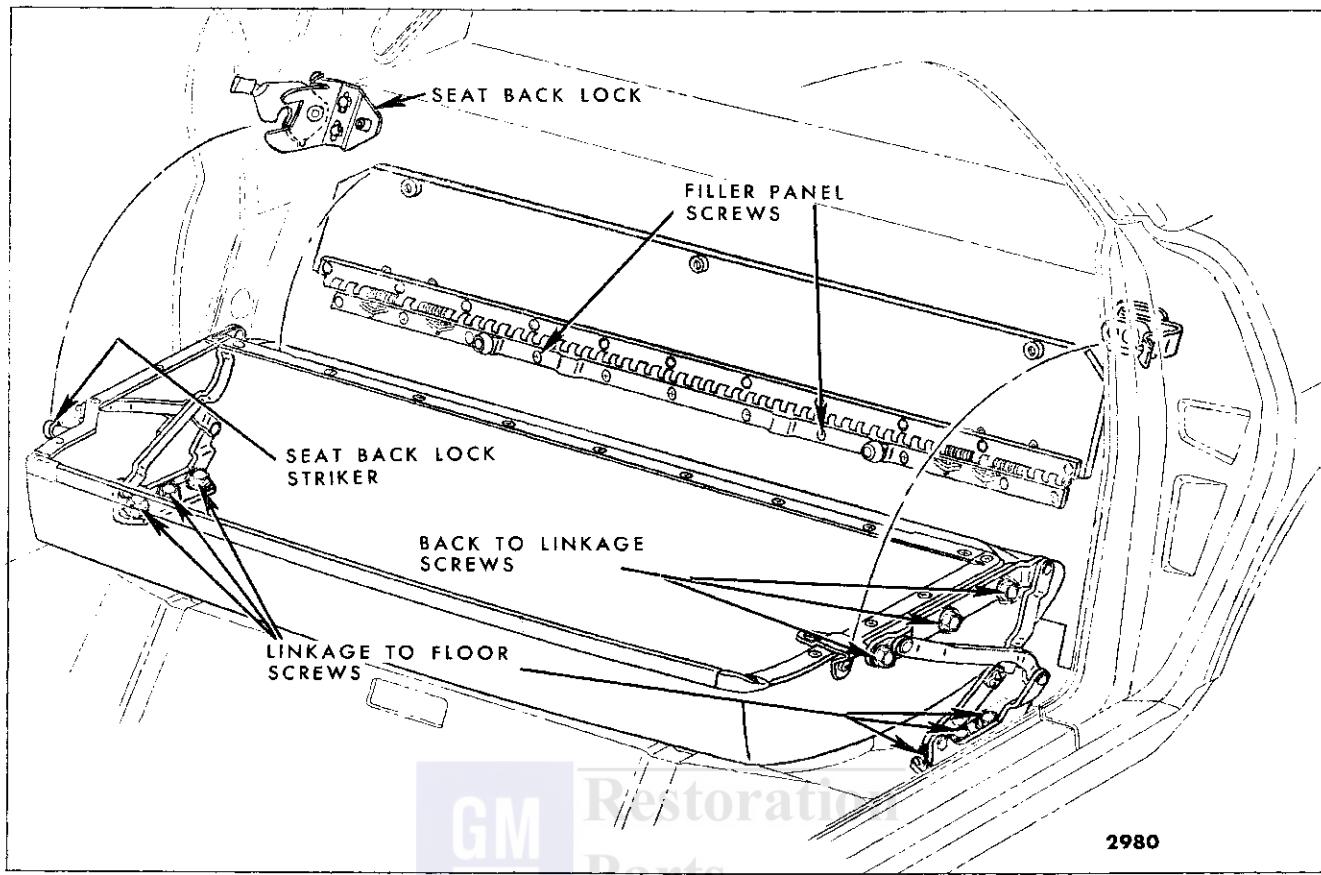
Folding Rear Seat Back Assembly — Corvairs
